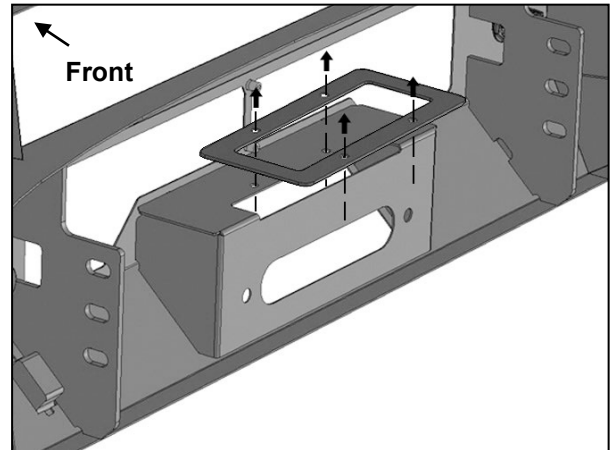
Attach Winch Tray Bracket Assembly to bottom of frame. Install Skid Plate Bracket over Bracket Assembly
